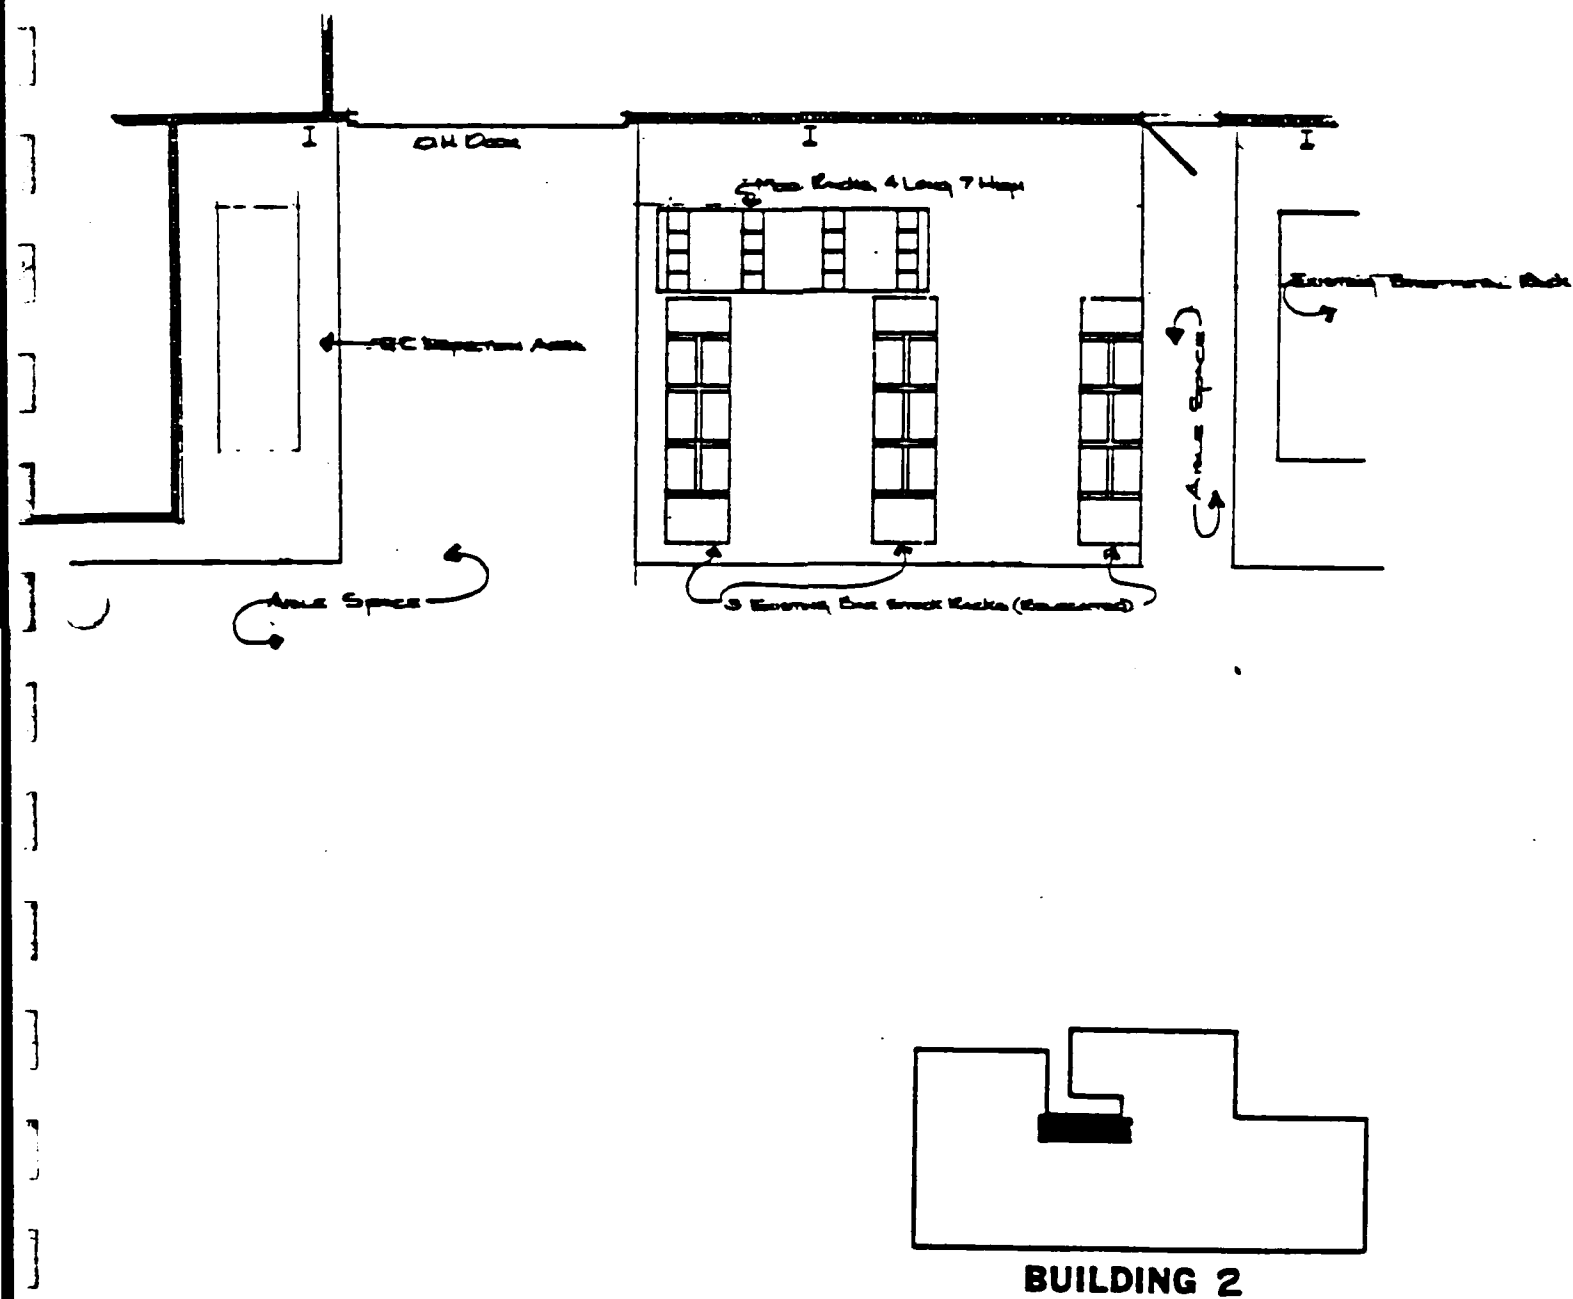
IMPROVED RAW STOCK STORAGE AREA LAYOUT
